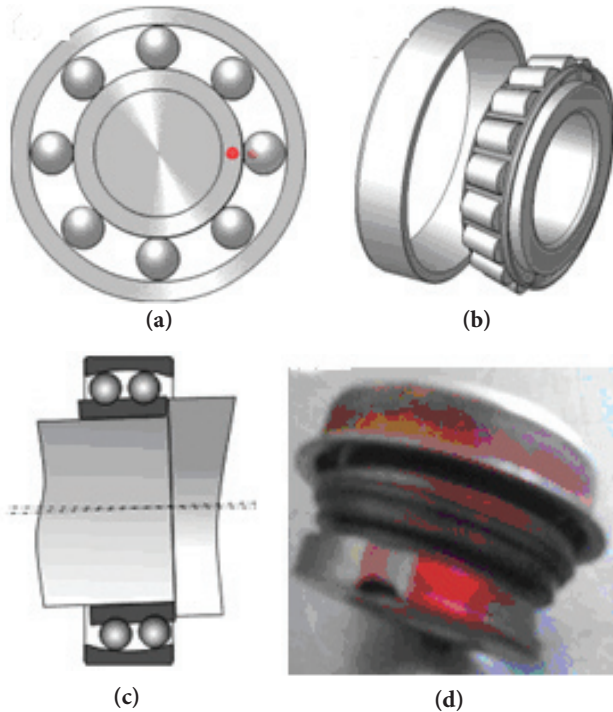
Images of. (a) Ball. (b) Taper roller. (c) Angular contact bearings. (d) Mechanical seal in water pump.
